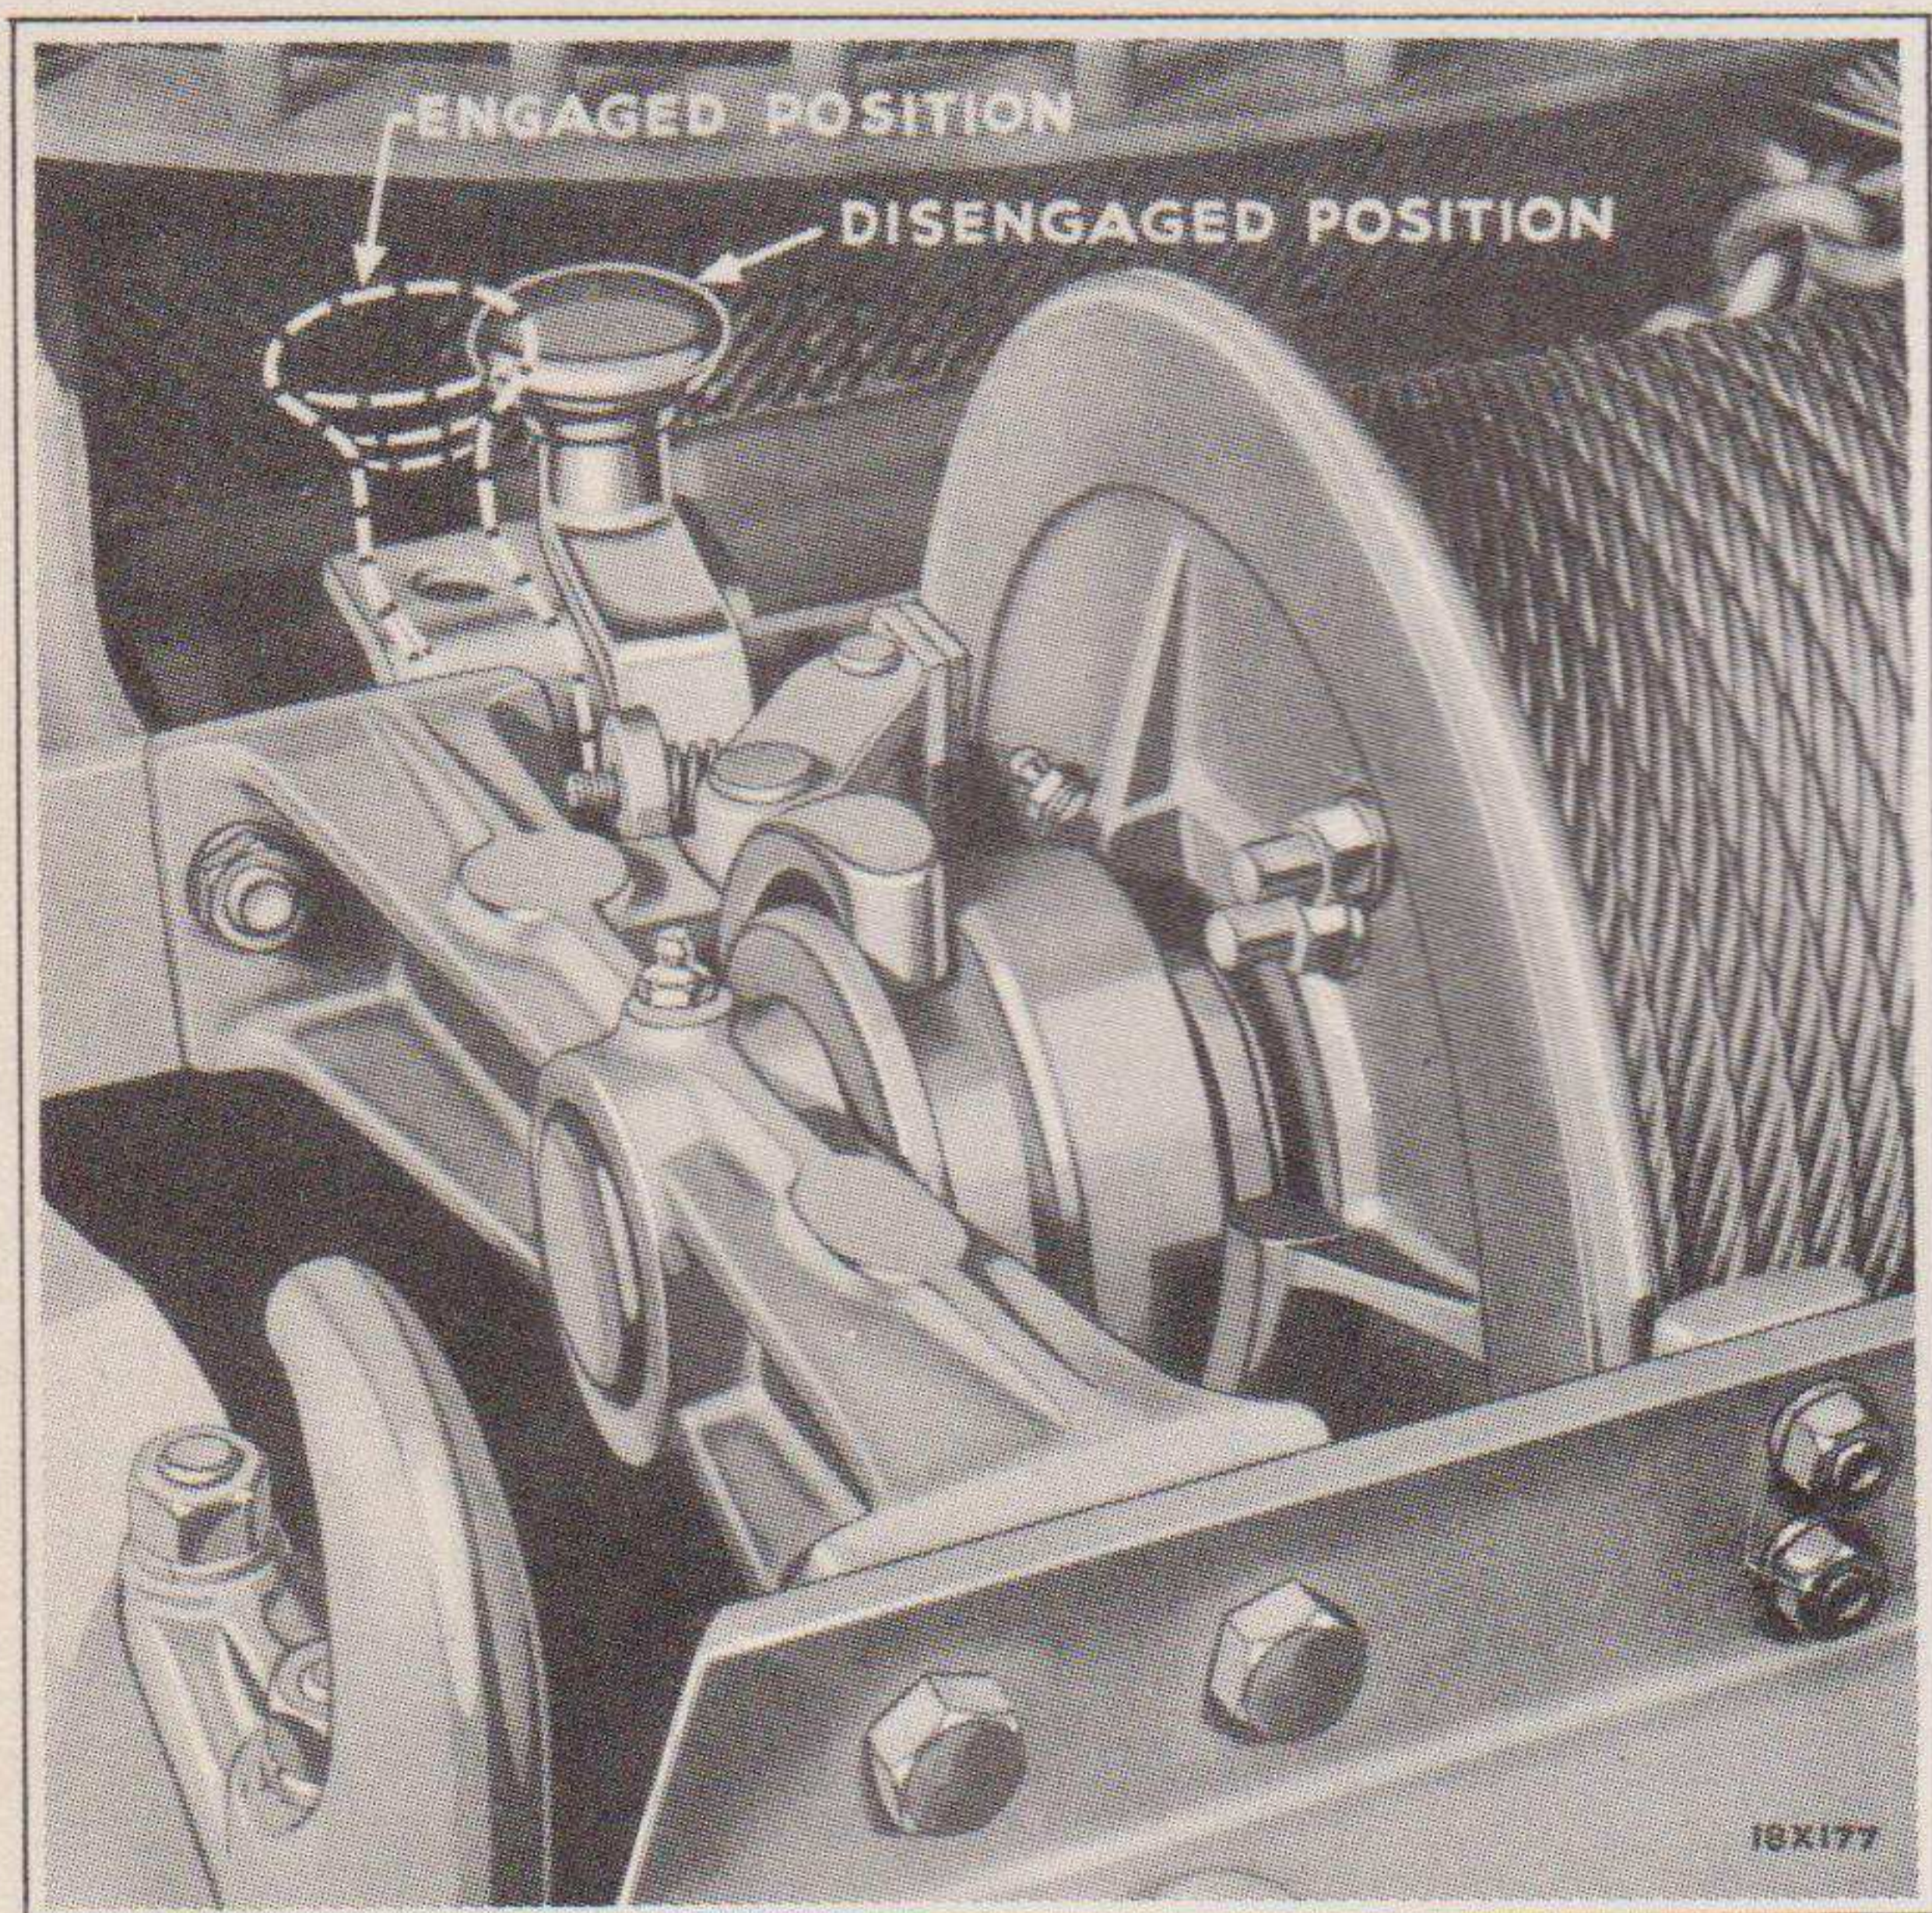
Winch Clutch Shifter Fork Handle Positions
